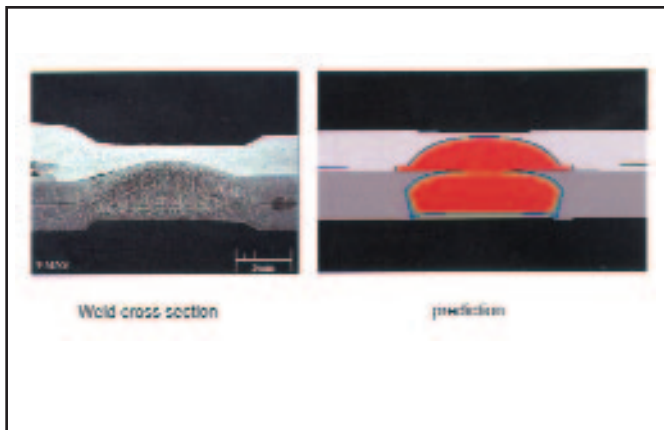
Weld structure at the end of the third welding pulse.
